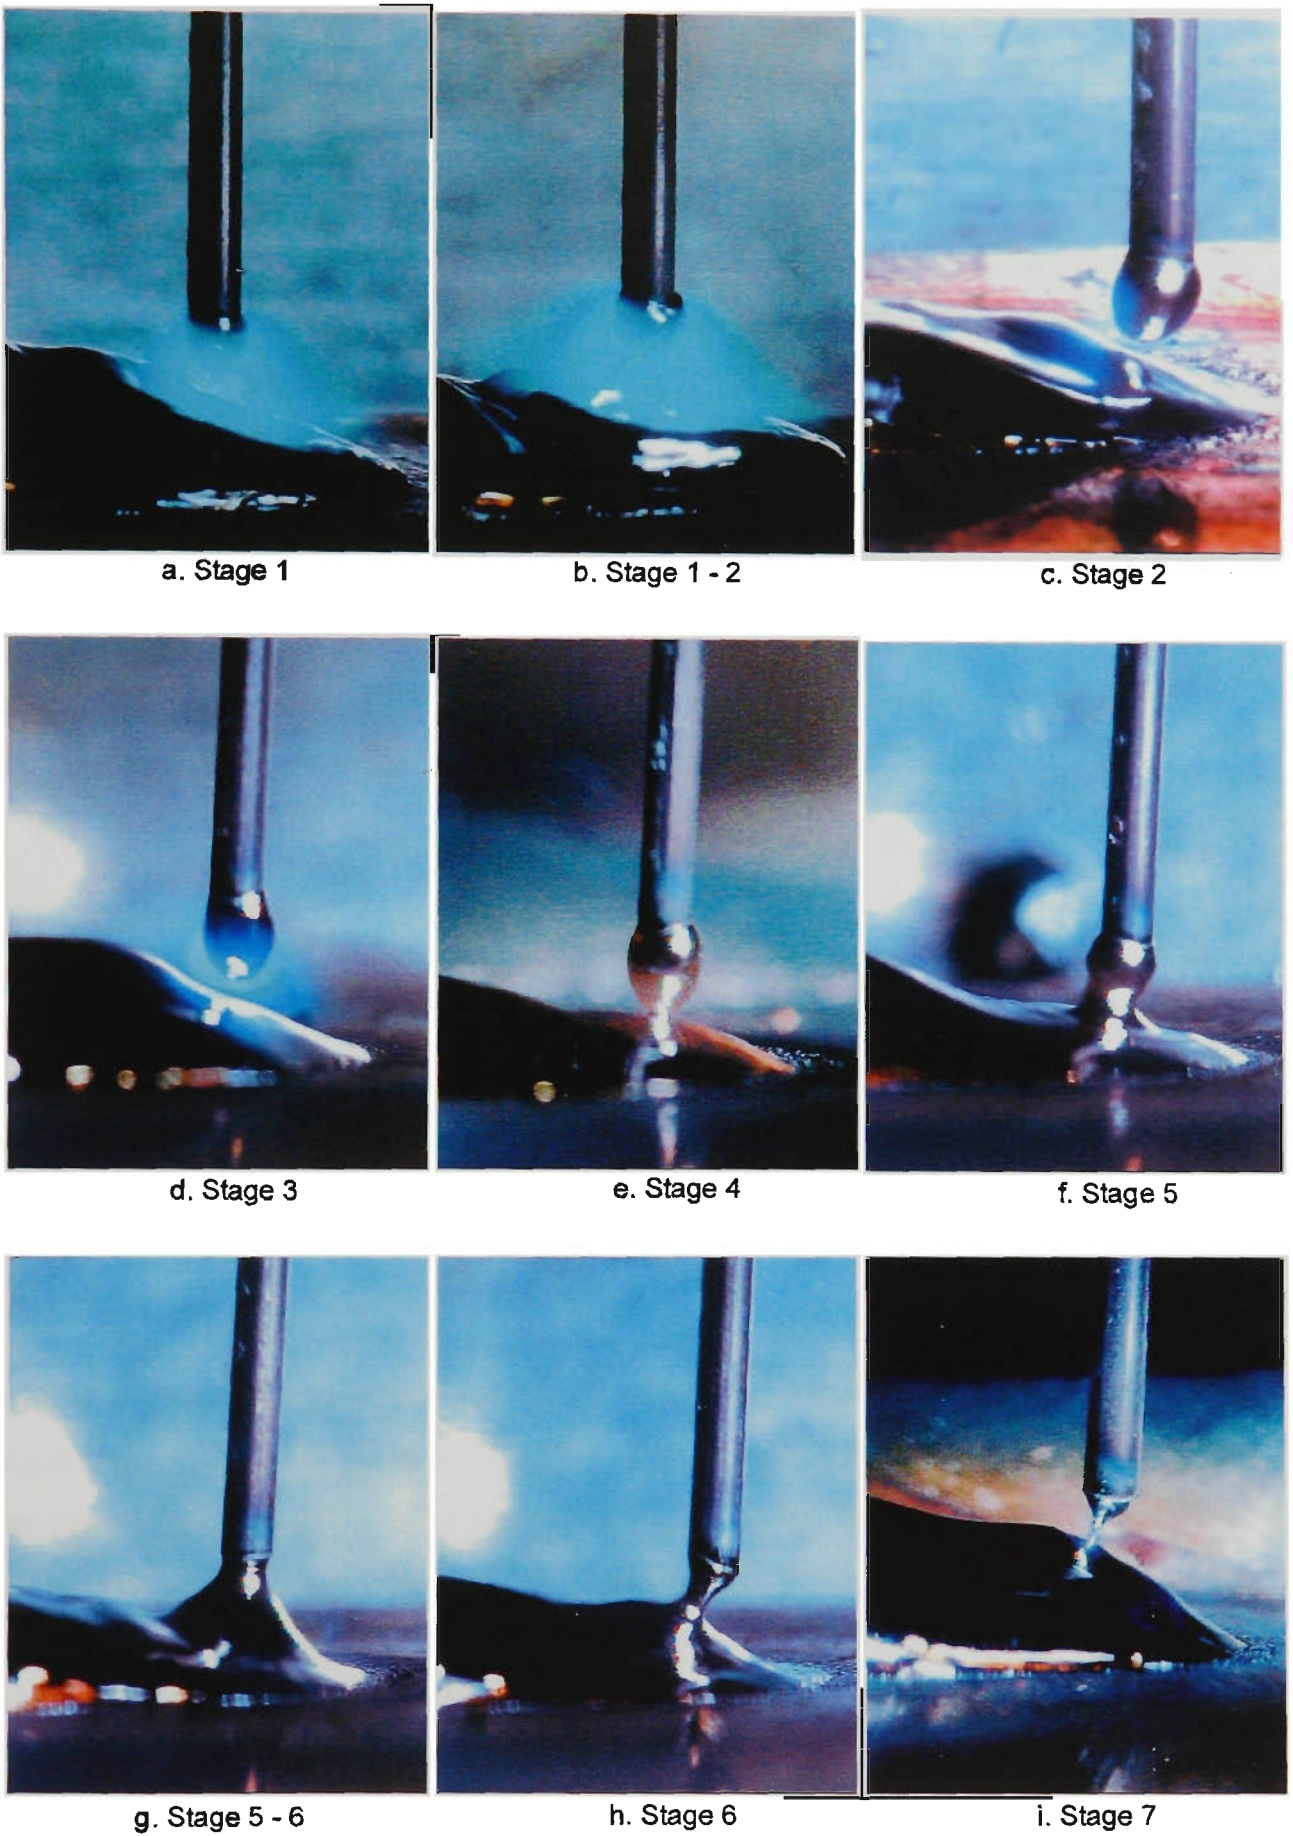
Photographs of weld area at various stages in welding cycle
